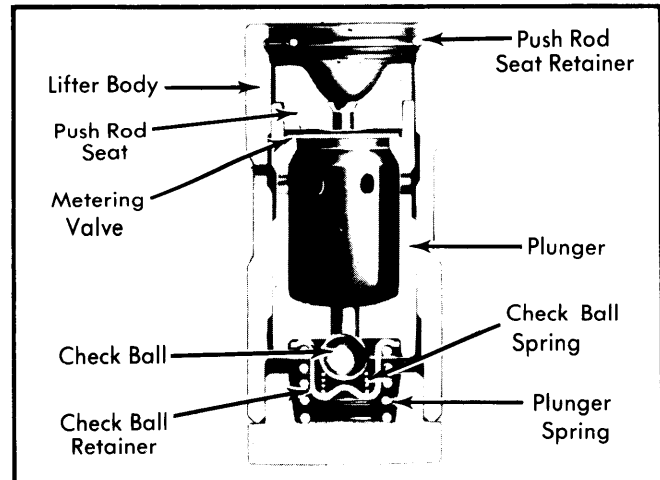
Cutaway of Hydraulic Valve Lifter Assembly
